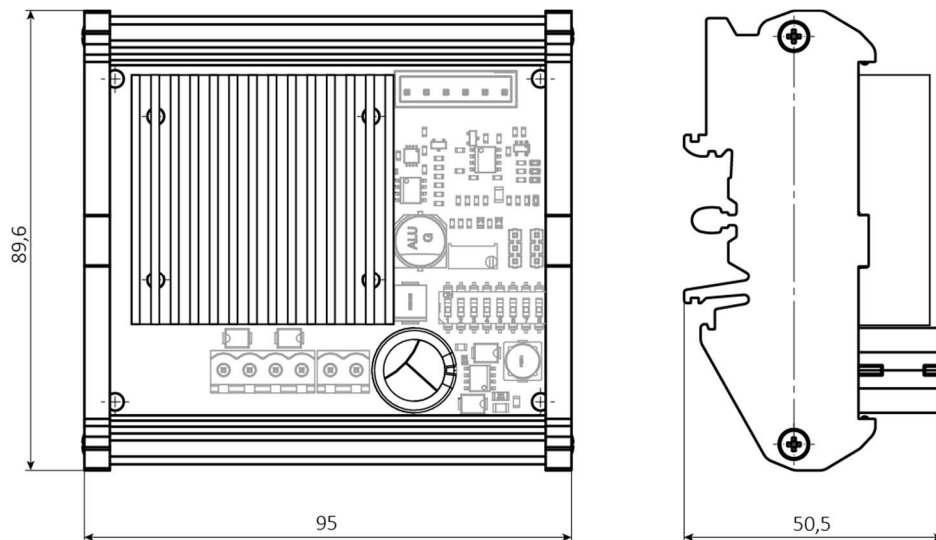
Dimensions of stepper motor driver SMD-2.8 carrier kit version
